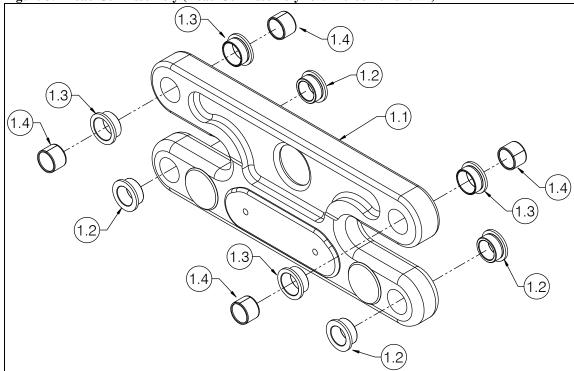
Load Cell Assembly (Load Cell Assembly P/N 210-087-01 shown)
